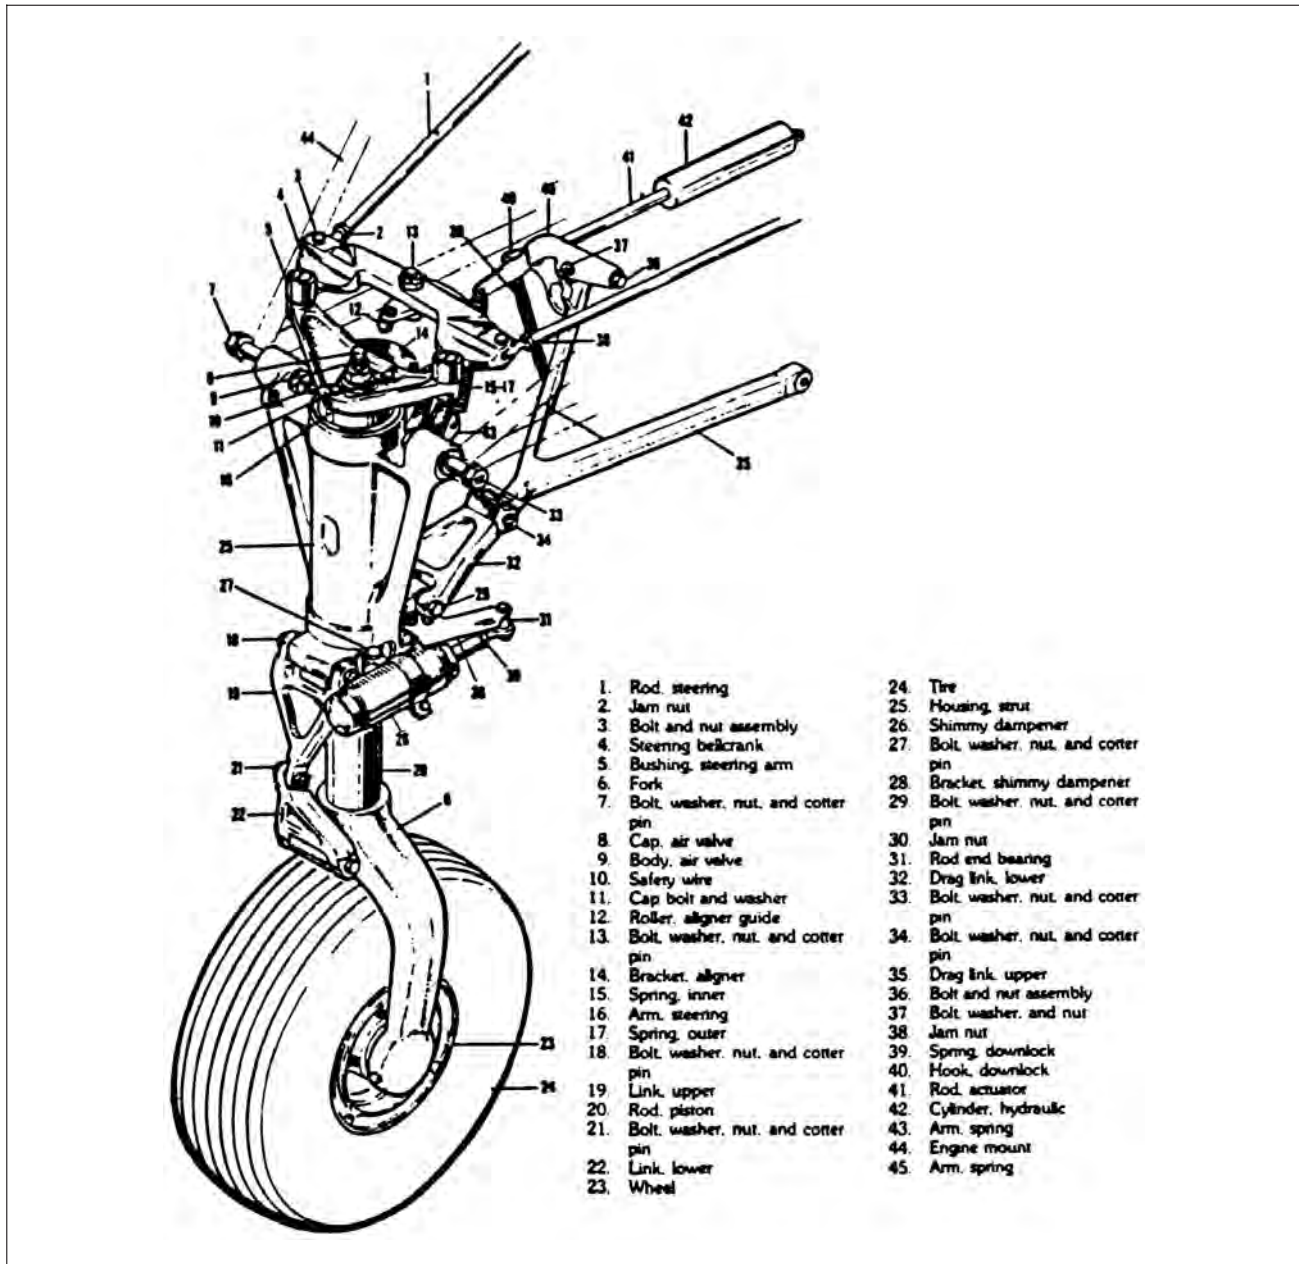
Nose gear for light airplane showing the steering mechanism.
